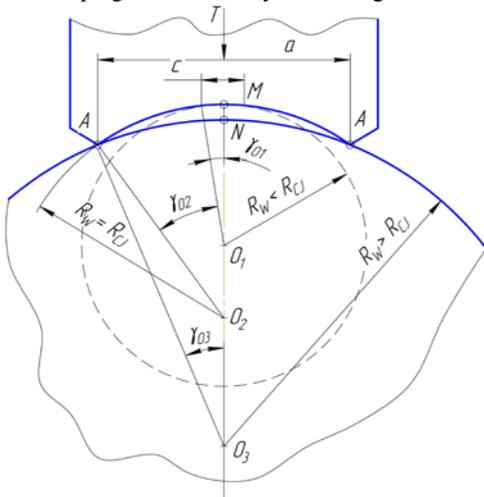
Options for the jaw contacting with a smooth cylindrical surface: R_{Cj} – radius of a jaw clamping surface; R_w – radius of workpiece clamping surface, T – clamping jaw force
